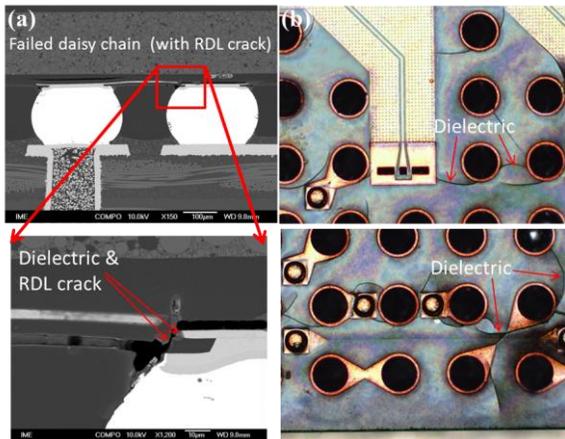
Failure mode images of TCoB samples (a) Cross-section of cracked Dielectric layer and RDL trace (b) top view of the failed FOWLP surface after detached from PCB.
